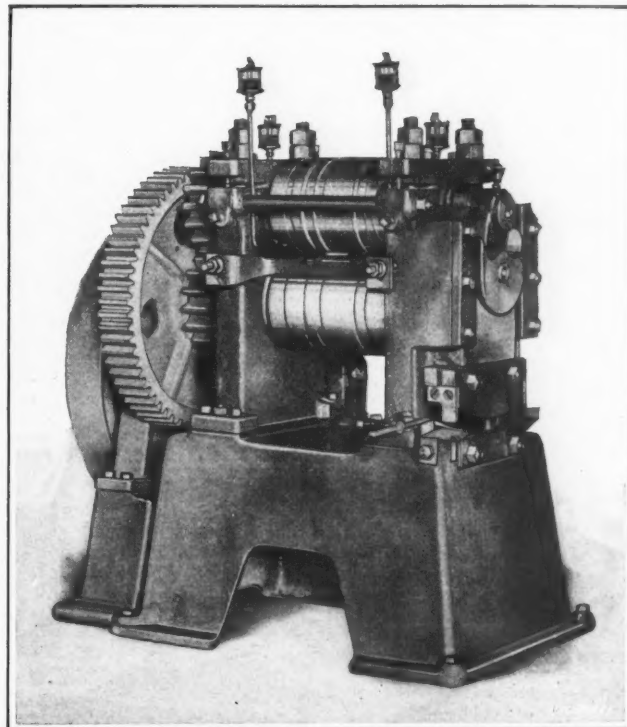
Special Rolling Machine for forging Tapered Brake Shoe Keys
